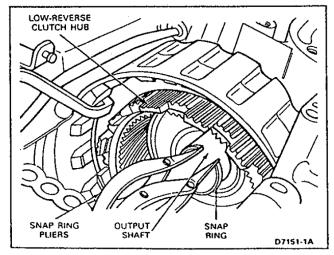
Removing or Installing Reverse Ring Gear Hub, Snap Ring
